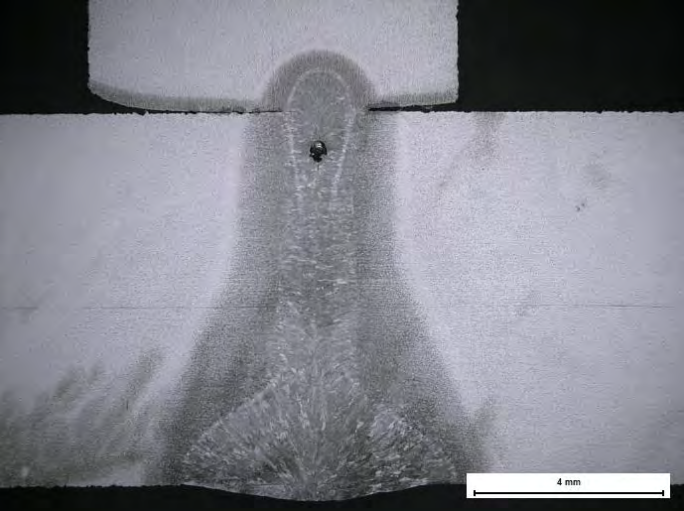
Stake weld, T-type, cross-section, overview.
